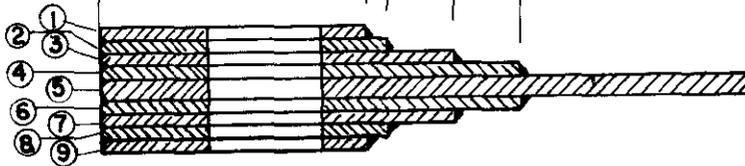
RESTRAINED WELDED SPECIMEN -- UPPER & LOWER PULLING TABS.
